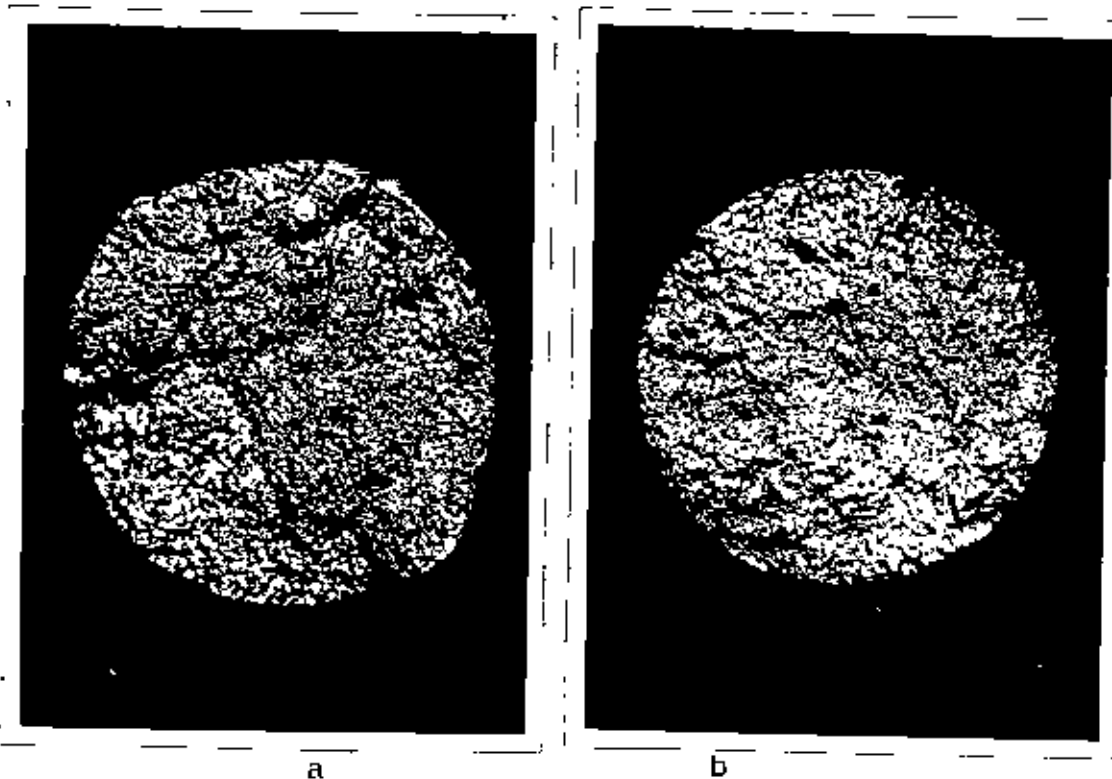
Fracture surface of Al-Si Piston alloy, a unmodified chill b unmodified sand; X5.
